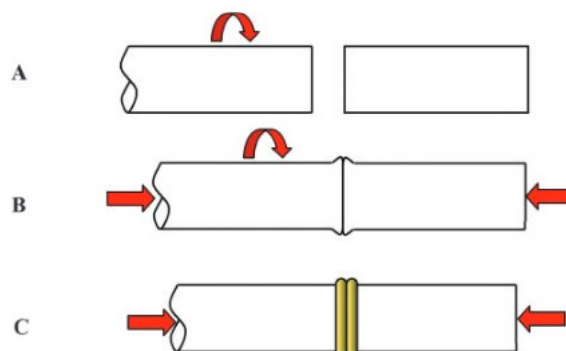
Basic steps in rotary friction welding process[3]
